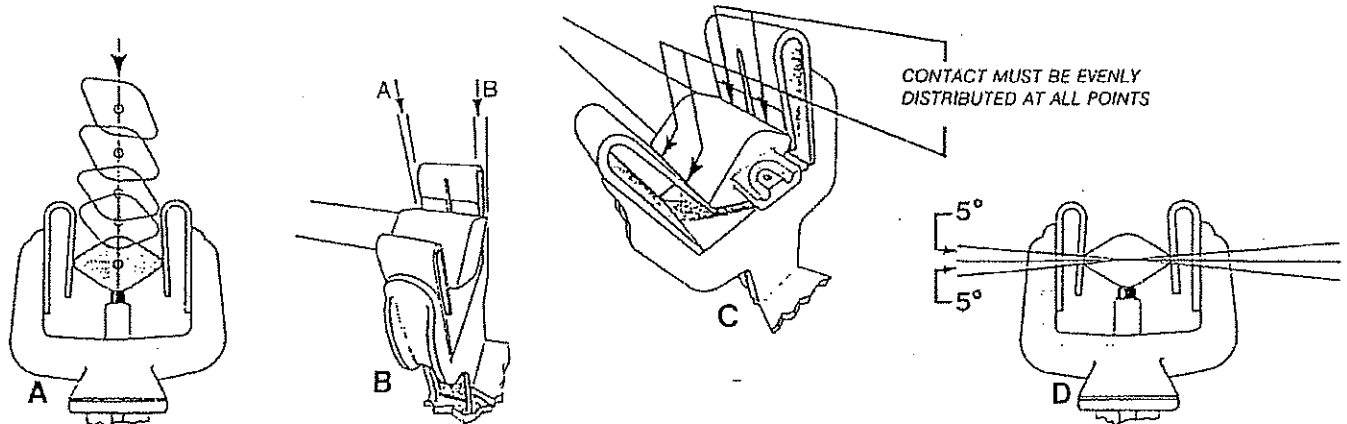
A - Proper blade motion. B - Lengthwise contact alignment (A must equal B). C - Axial alignment. Evenly distributed contact at all points, on both sides. D - Blade tip horizontal in switch jaw.
